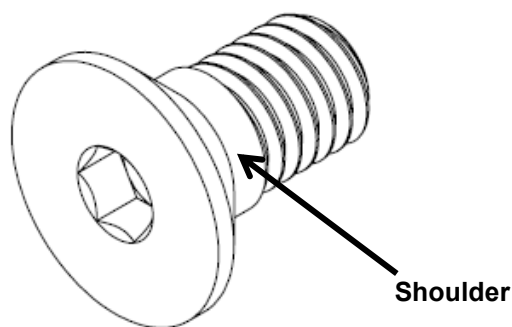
M5 x 10 flat-head cap screw with precision-machined shoulder
